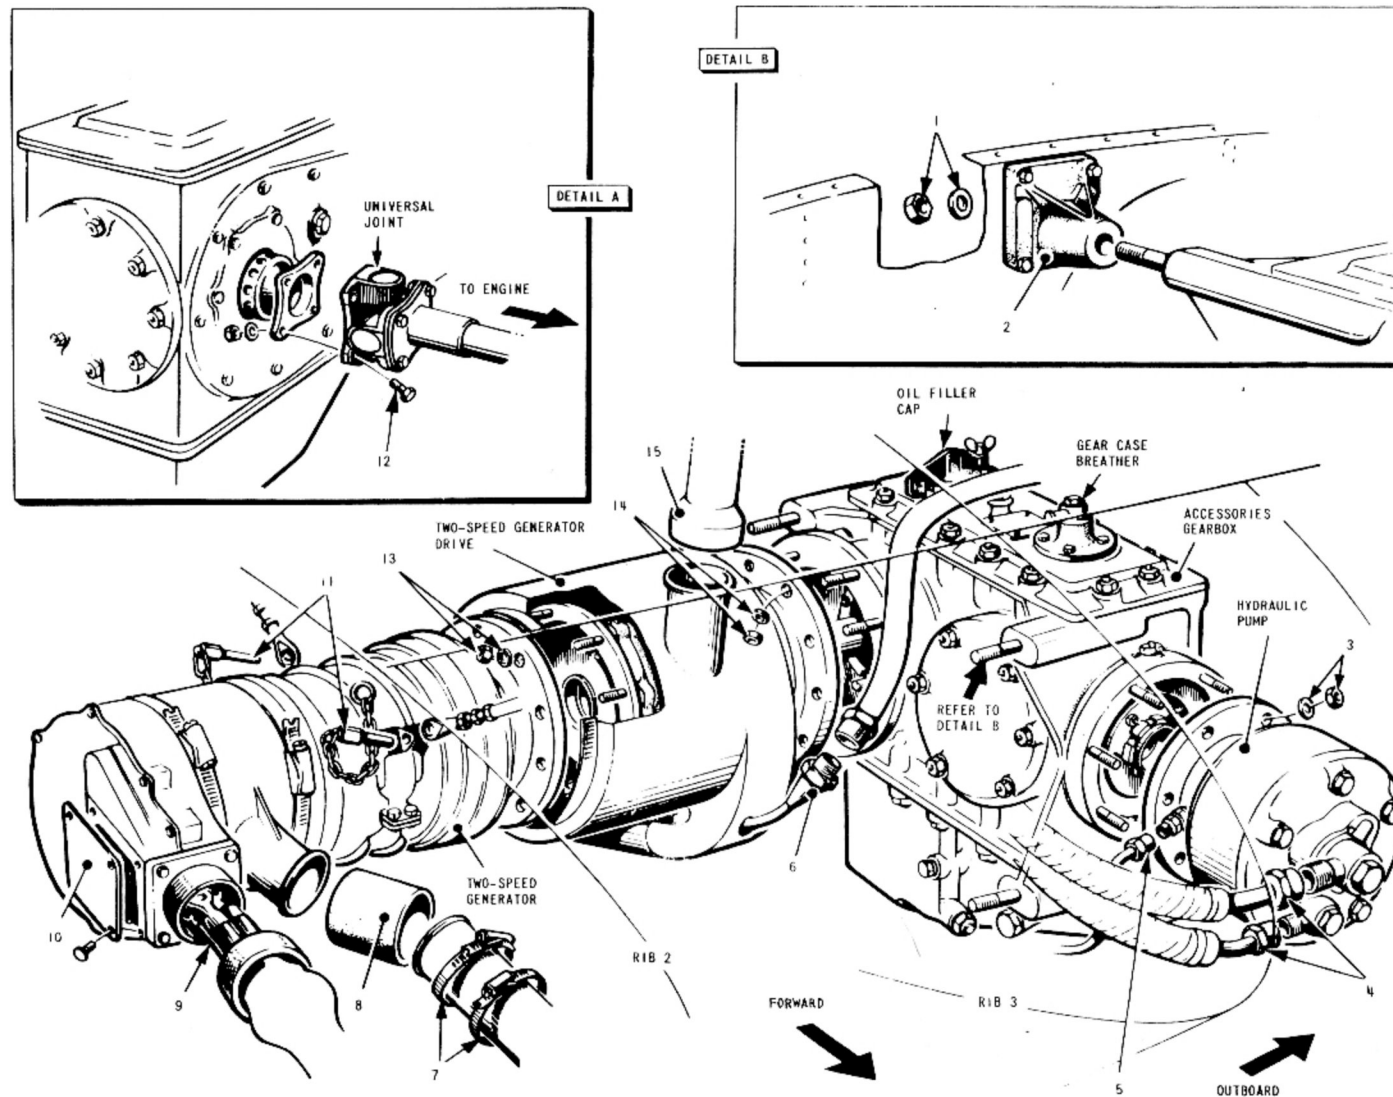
ACCESSORIES GEARBOX - REMOVAL AND ASSEMBLY
